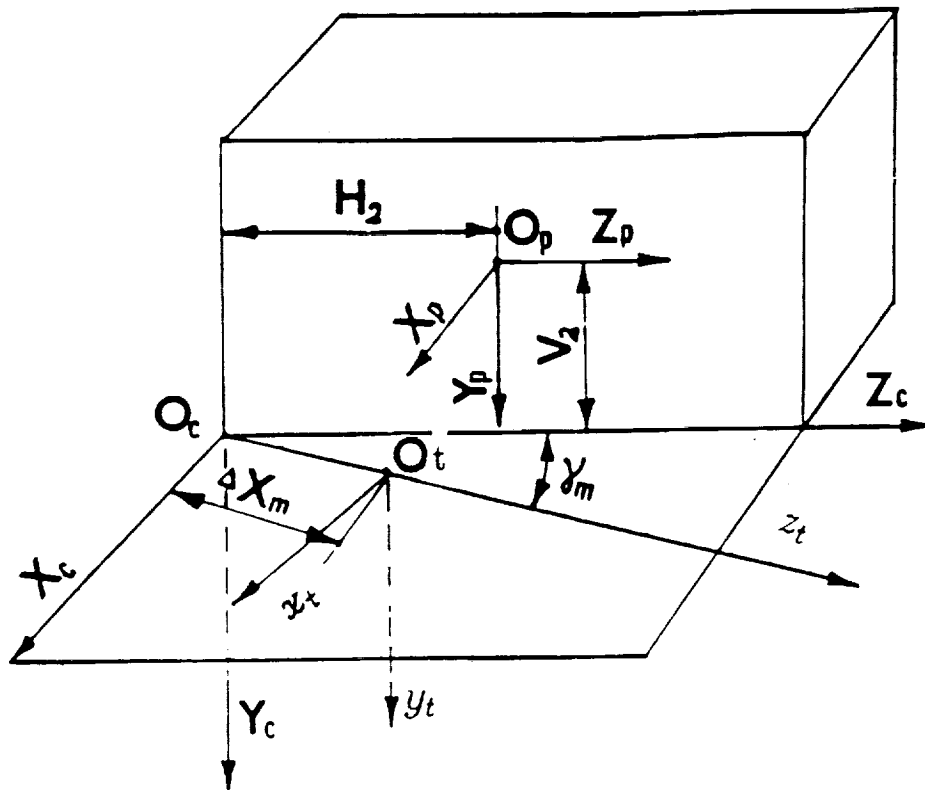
Machine-Tool Settings For Formate Cut Gear
